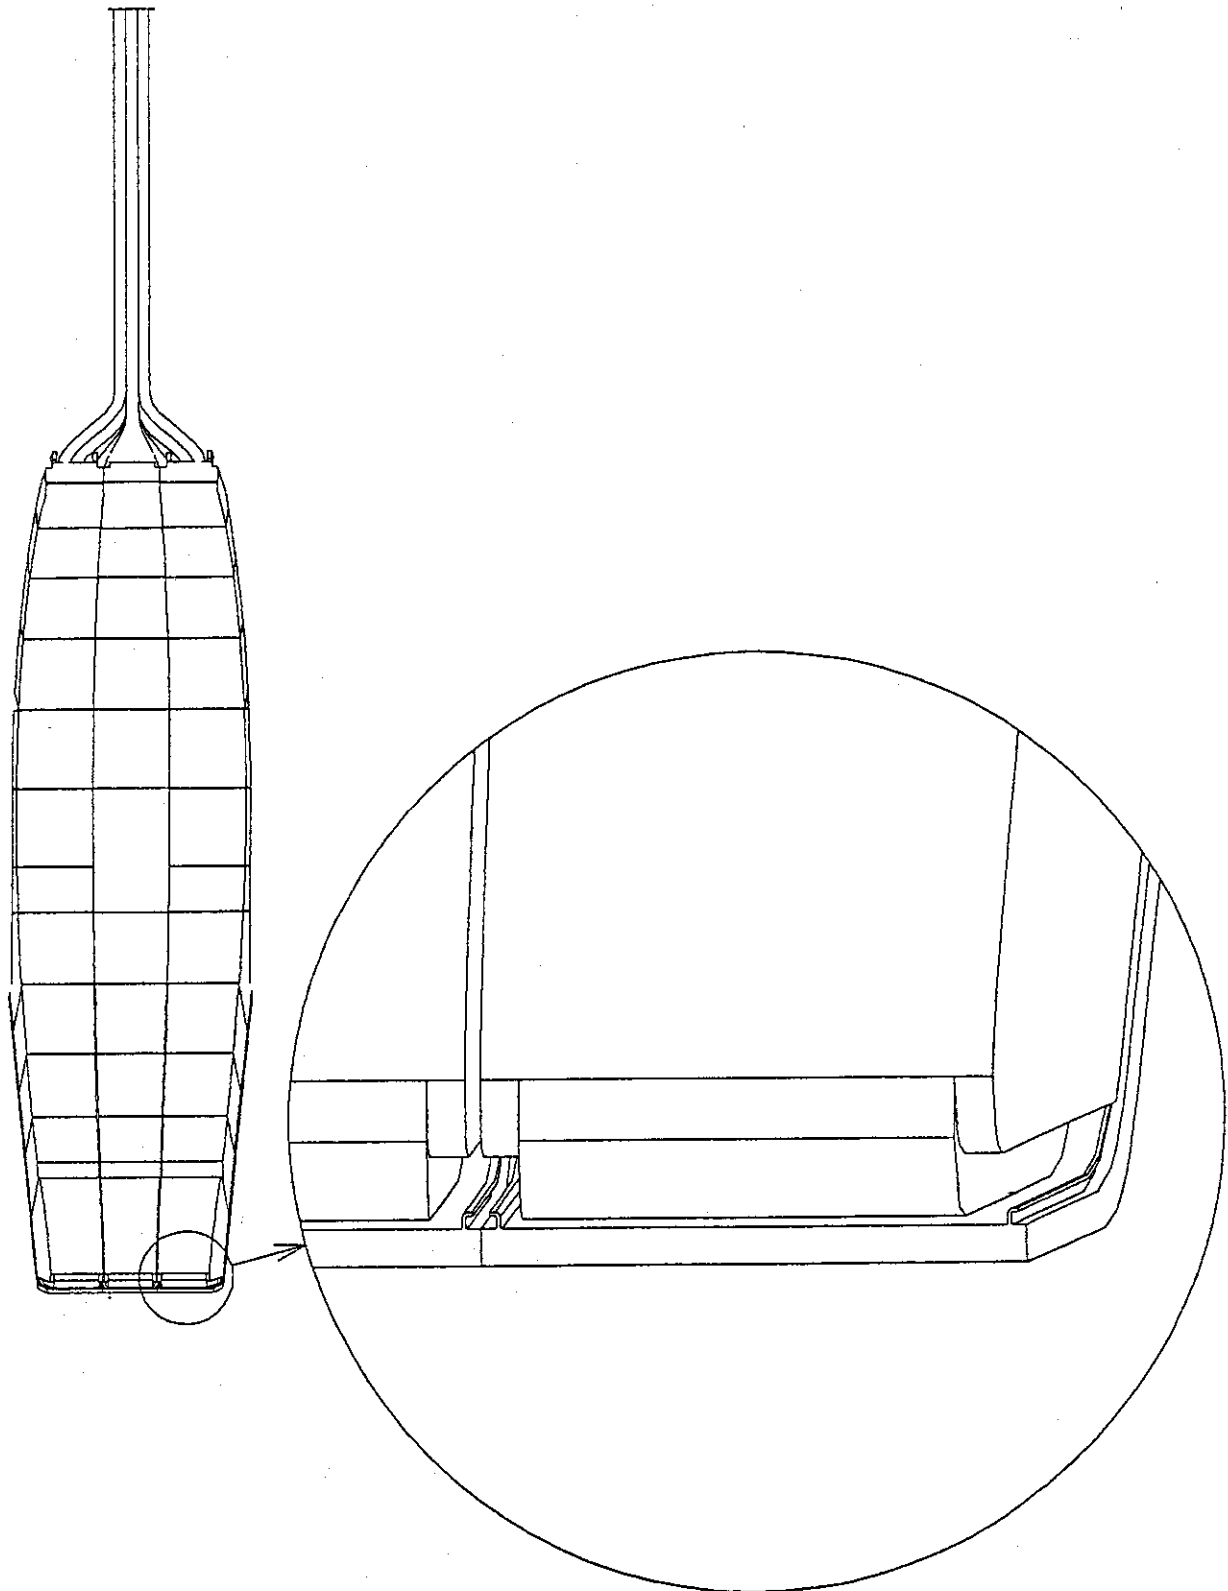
One possible solution for the access route of the on-site cutting/welding machine head for the blanket module legs; from the bottom of the blanket.
